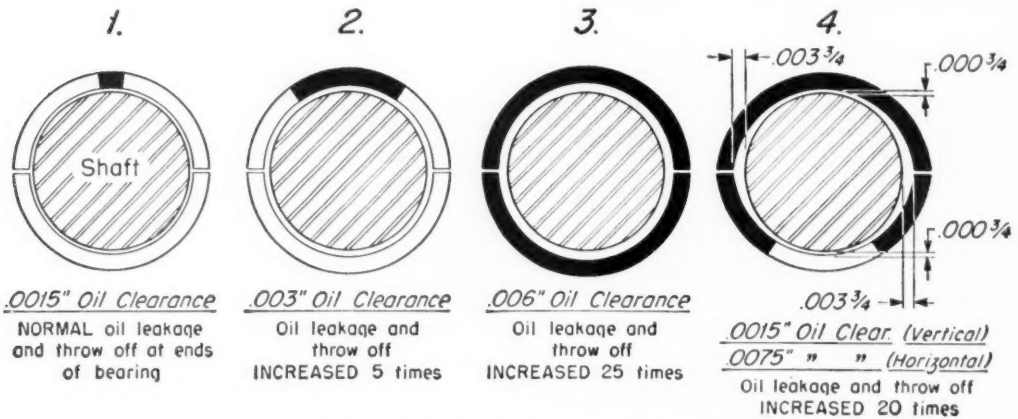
Diagram showing bearing oil leakage and end throw-off for various shaft clearances. (Data obtained with 2-inch diameter shaft.)
